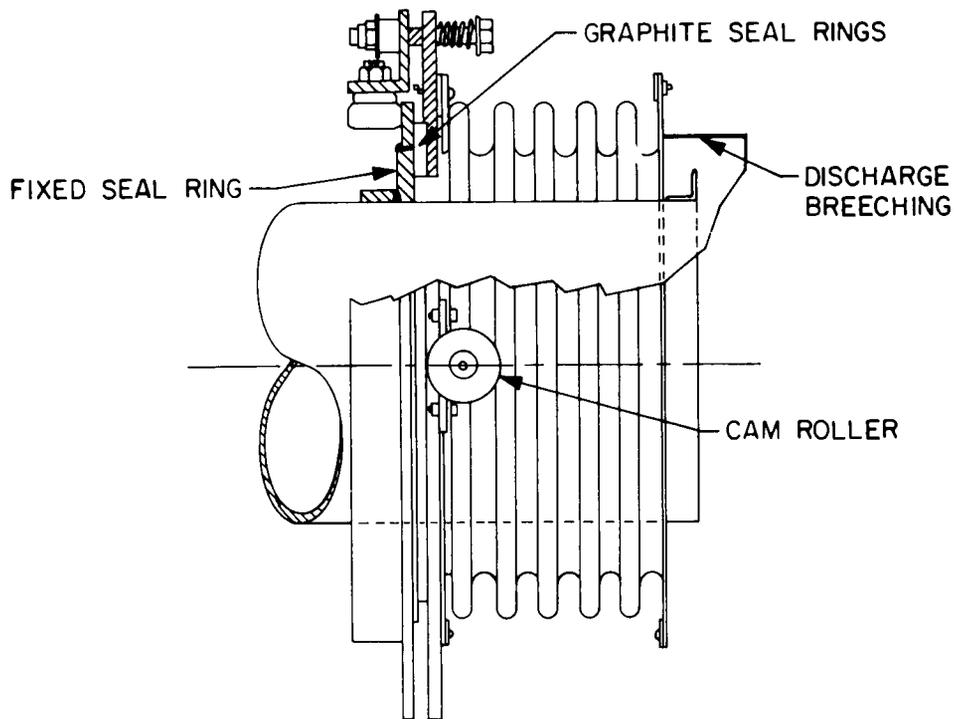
Breeching sections support a bellows and rotary seal.
